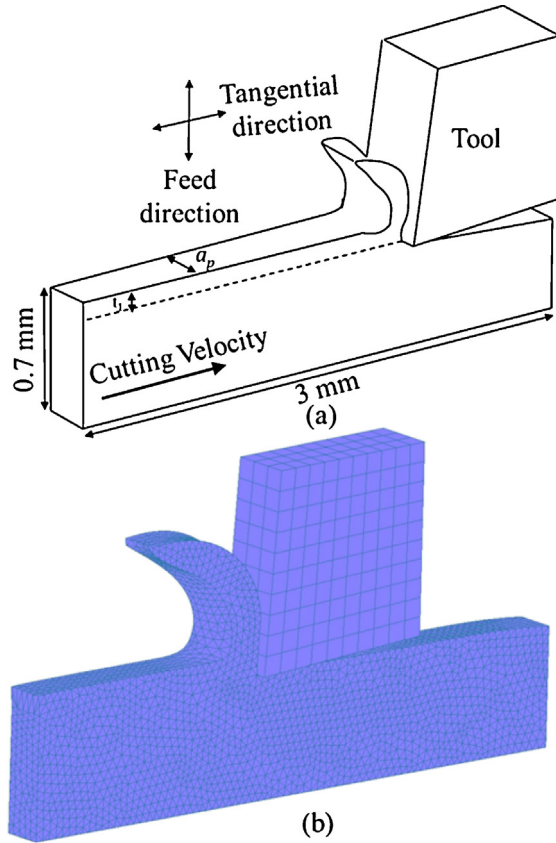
(a) Schematic of cutting model; (b) fully formed chip with re-meshed body
